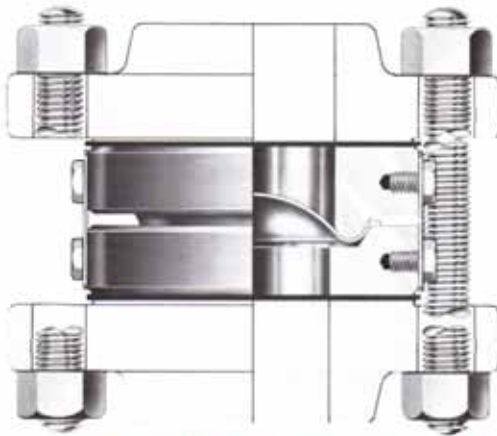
Bolted type fitting with "QUICKSERT" preassembly.
